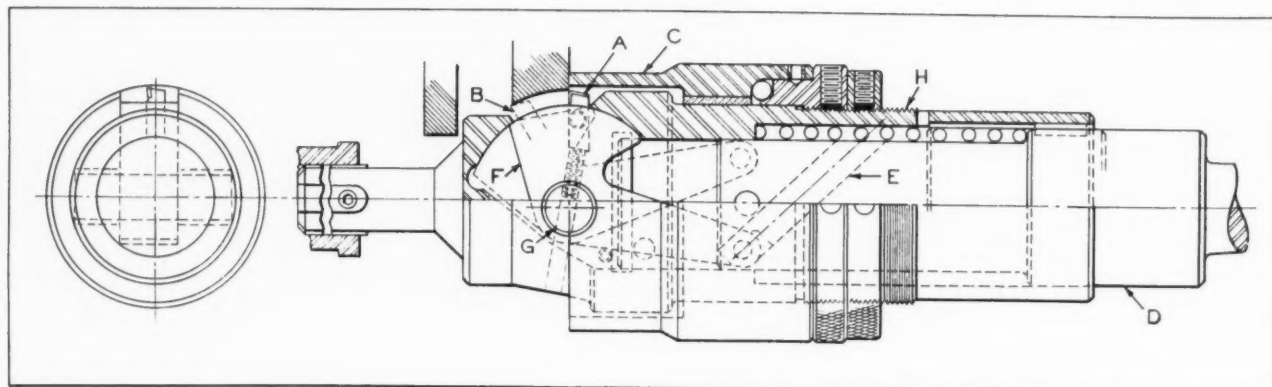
Assembly Drawing of Special Swiveling Tool Employed for Preliminary Boring Operation on a Spherical Seat of Automobile Transmission Cases
